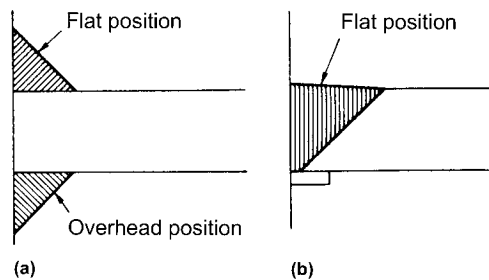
Comparison of welds in the flat position in a T-joint. Fillet welds (a) are more expensive than a single-bevel groove joint (b) because of the overhead weld required.
